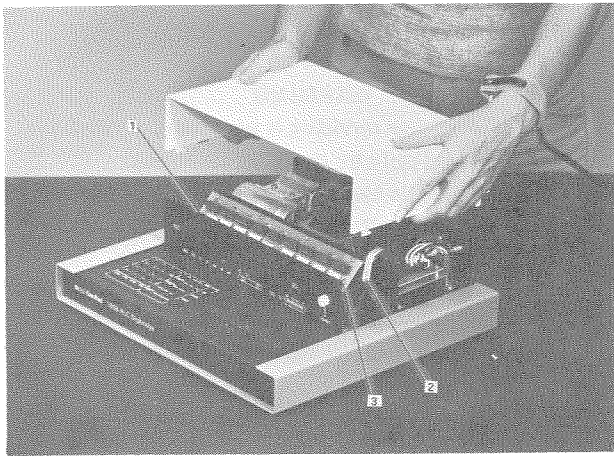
Removal of top cover. Items 1 and 3 are screws that hold the display board. Item 2 is ribbon cable 1657-0200 that connects power supply to main board.
